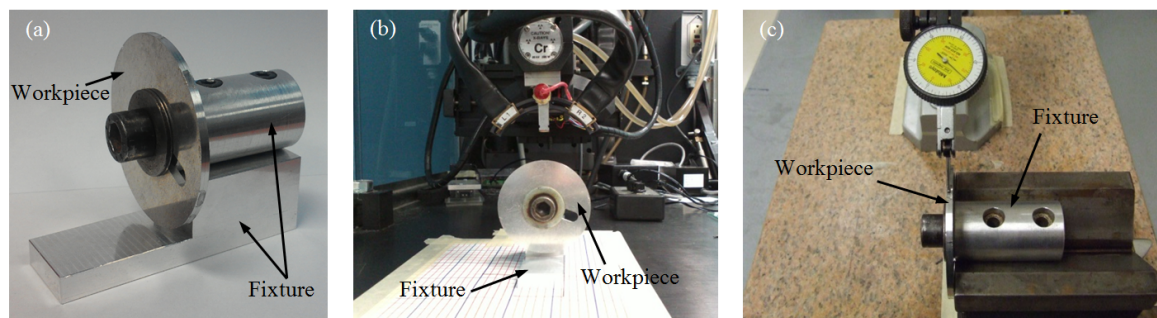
(a) Fixture configuration of the workpiece (b) Measurements of the residual stress using Proto iXRD machine (c) Measurements of removed layer thickness using Mitutoyo dial indicator
